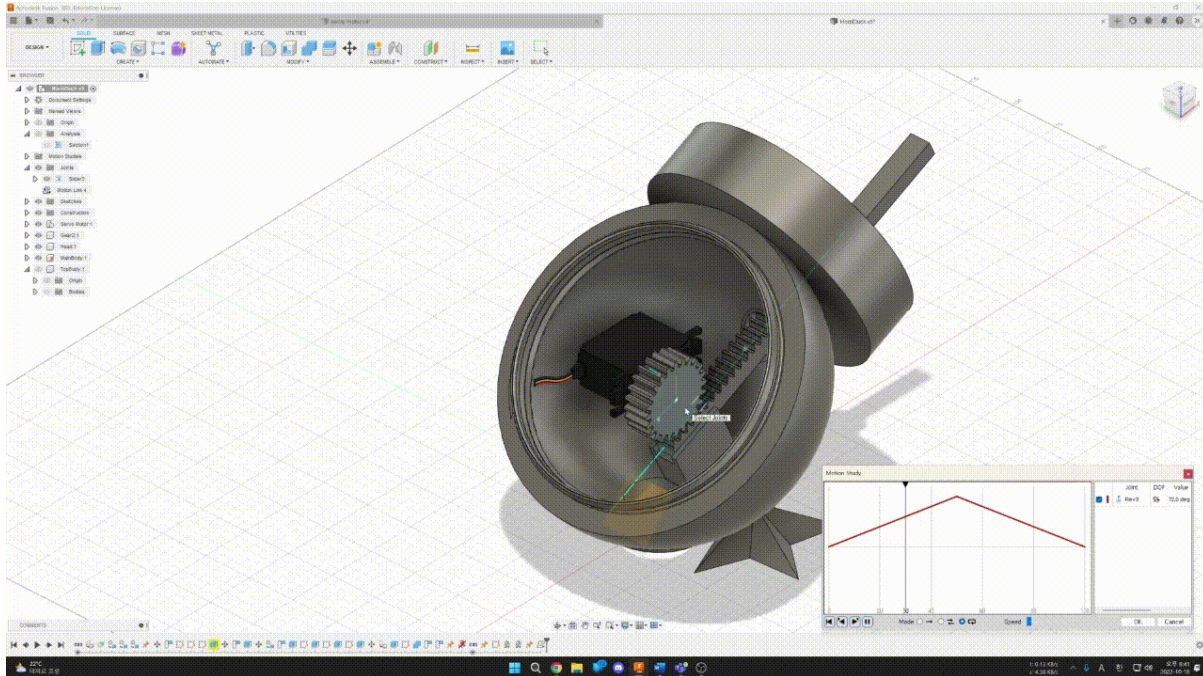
Servo motor and Rack and Pinion gear inside of Character with simulating
